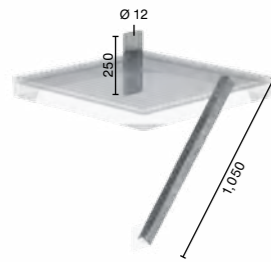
(flange plate and strut for brick masonry)
